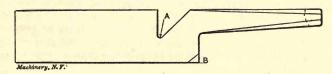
Recommended Practice for Lengthening a Boring Tool Stem
